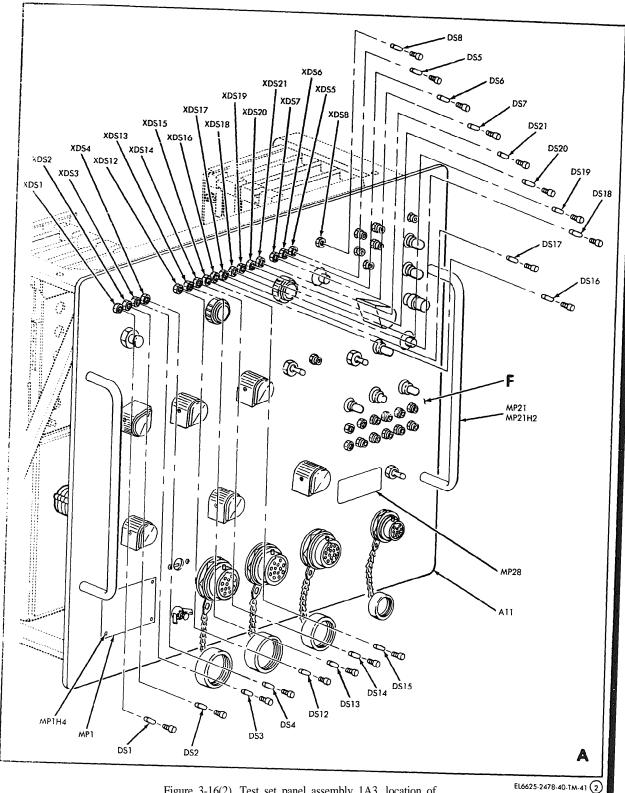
(2). Test set panel assembly 1A3, location of parts (sheet 2 of 7).
